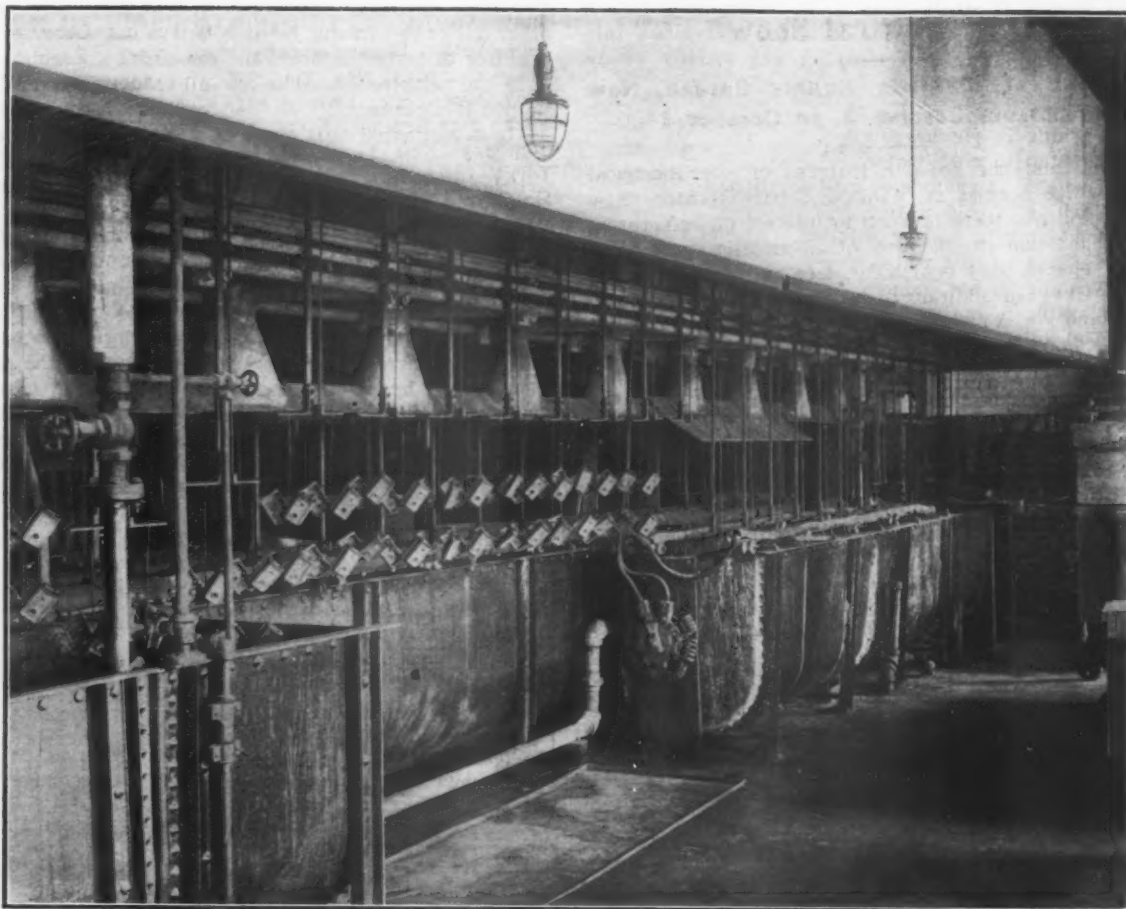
Side View of Broderick Electroplating Machine, Showing Loading and Unloading Station.
